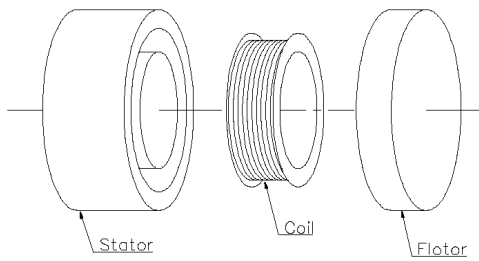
Exploded View of the Cylindrical Magnetic Actuator
